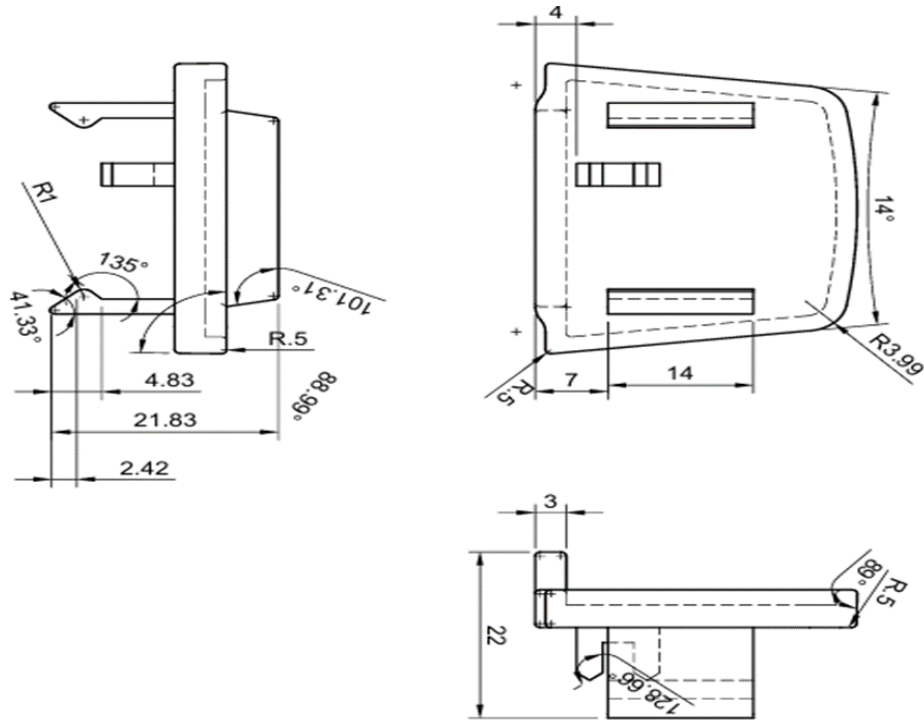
Lower Housing Insert CAD Drawing and Dimensions Part 5
